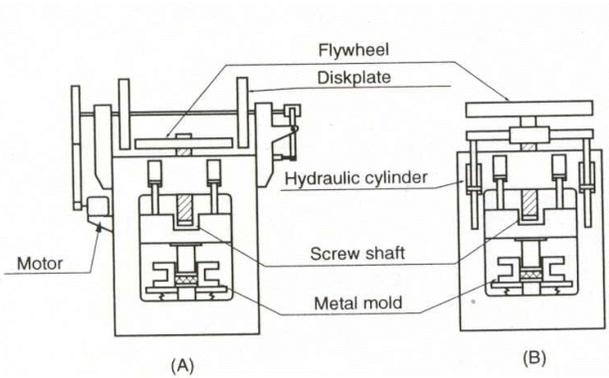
Friction Press (A), and Hydraulic Screw Press (B)
